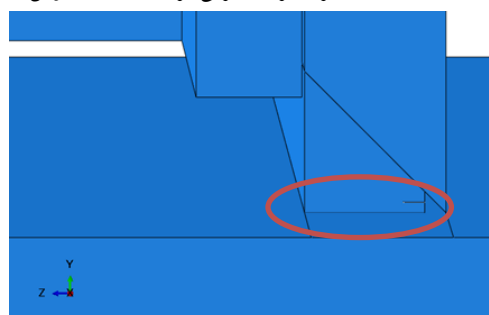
Schematic diagram of weld crack expansion in the welds.
